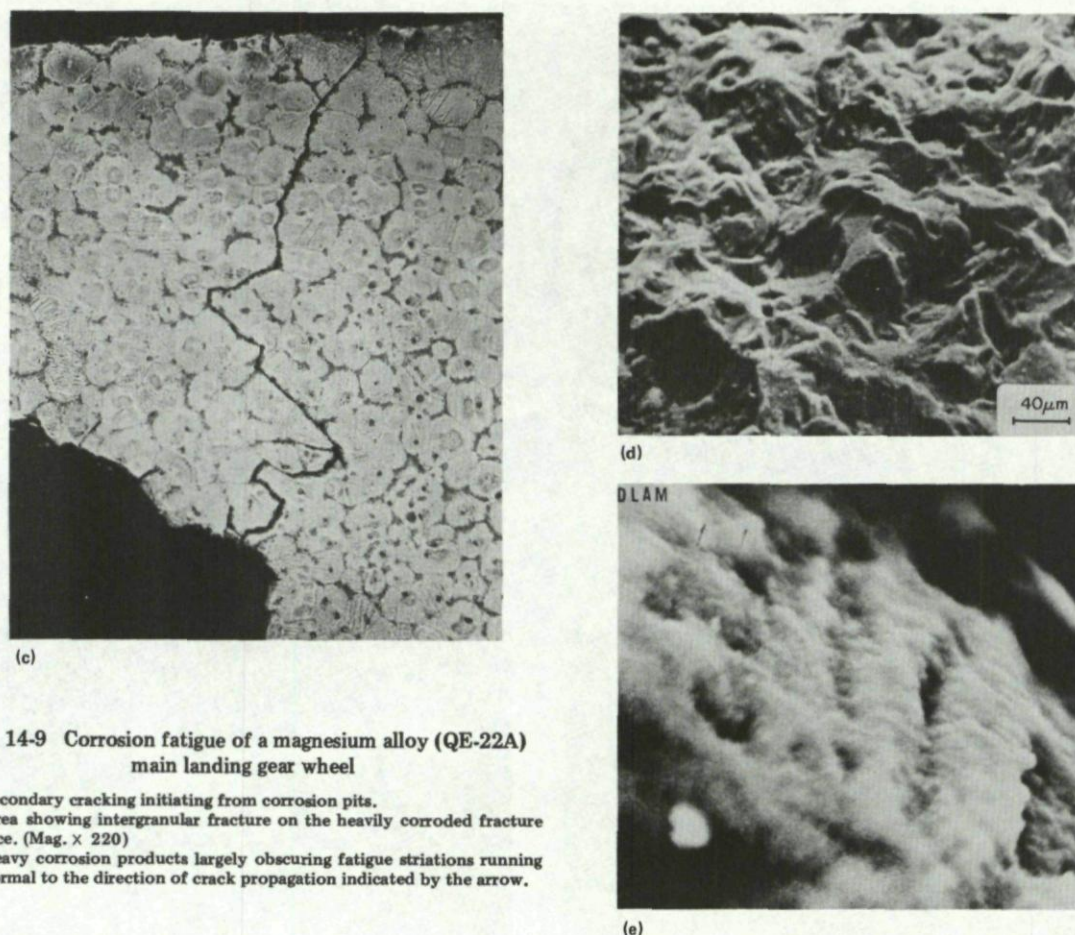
Corrosion fatigue of a magnesium alloy (QE-22A) main landing gear wheel
